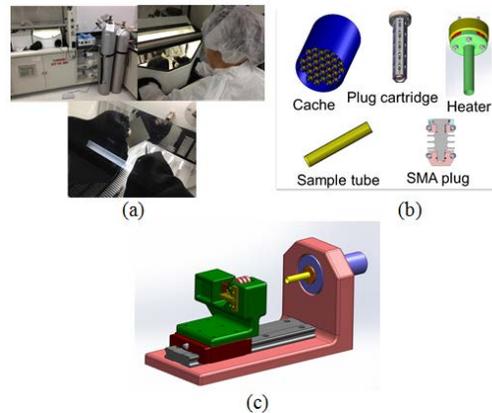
End-to-end sample integrity elements developed: (a) CO2 snow cleaning, (b) seal element hardware, (c) tube cutter for sample removal.
